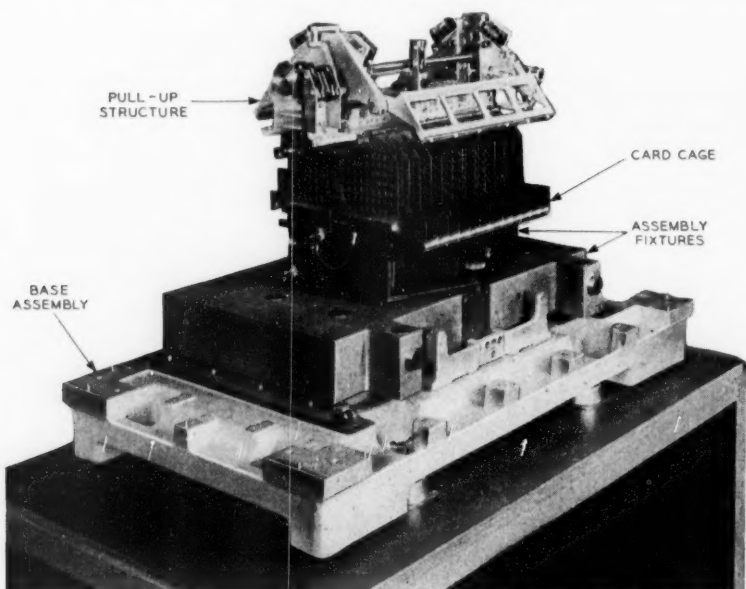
Base and assembly fixture together with card cage and pull-up superstructure.
